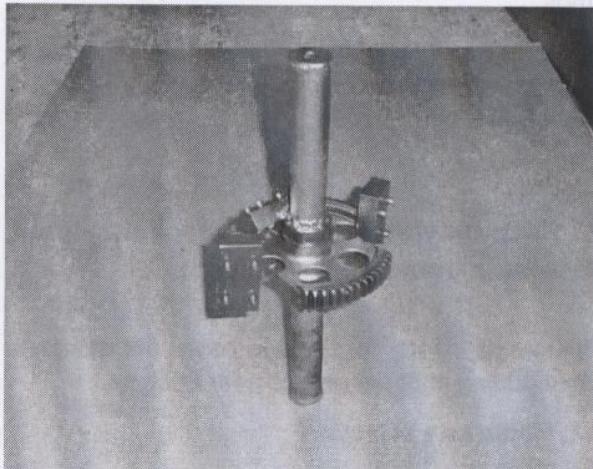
Examples of Almen block mounting on an actual gear part and on a representative geometry
